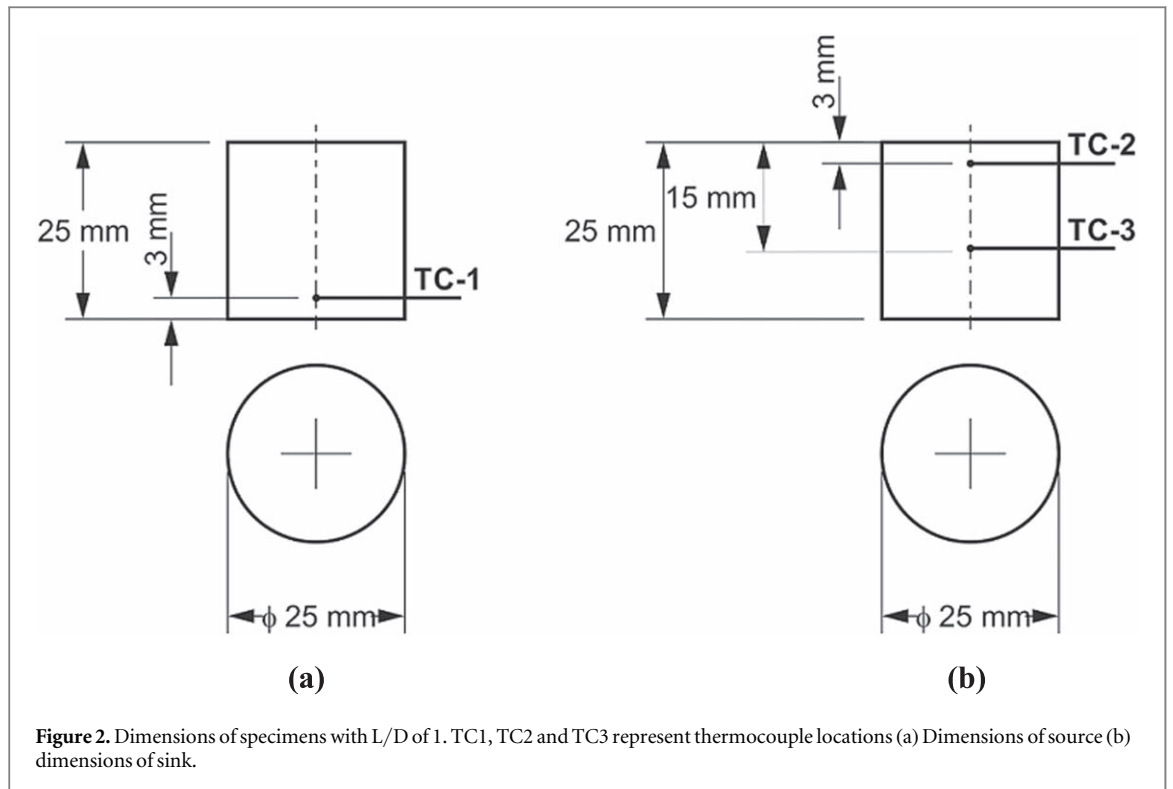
Dimensions of specimens with L/D of 1. TC1, TC2 and TC3 represent thermocouple locations (a) Dimensions of source (b) dimensions of sink.
